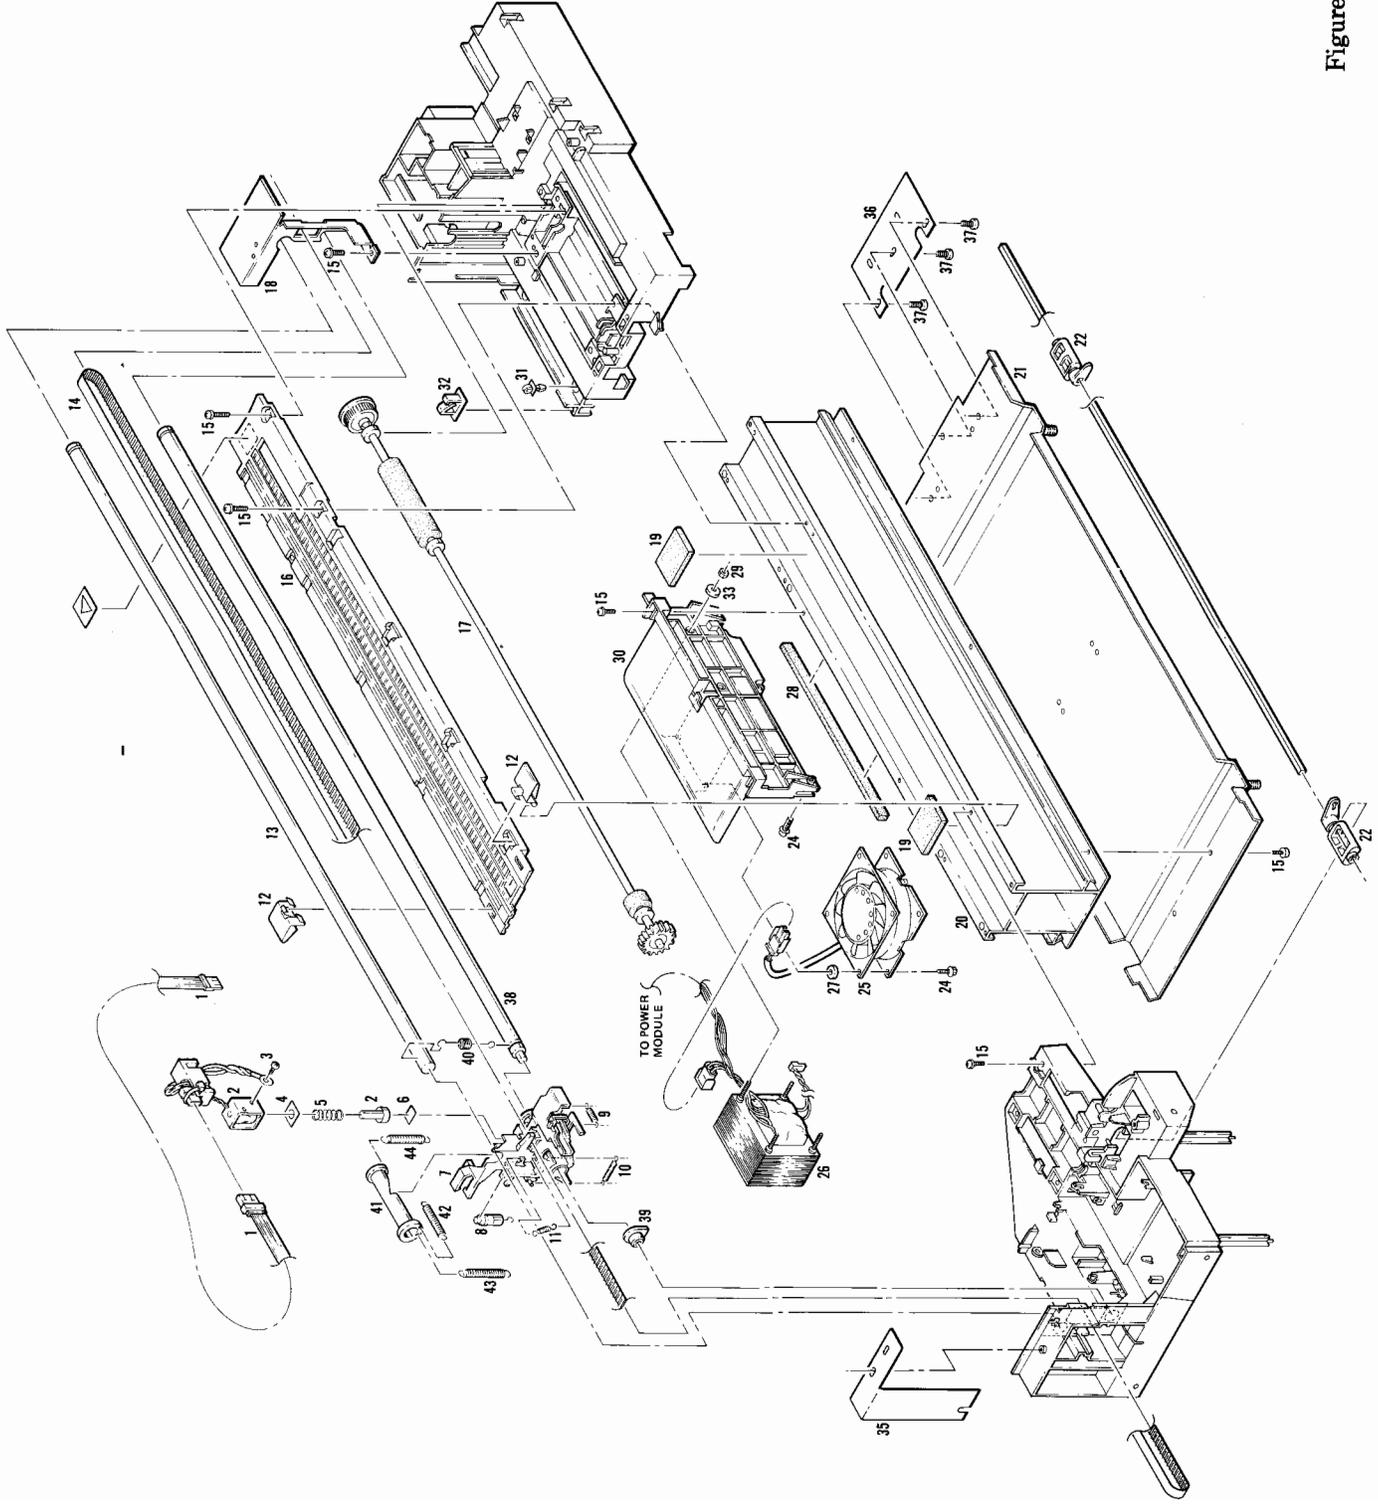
Center Chassis Assembly, Illustrated Parts Breakout
